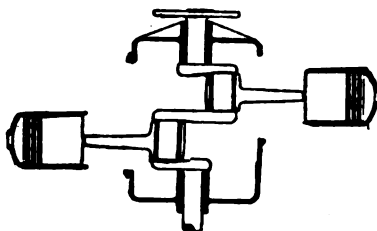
A two cylinder opposed type of engine with crank shaft set 180 degrees. Cylinders are also 180 degrees apart.
